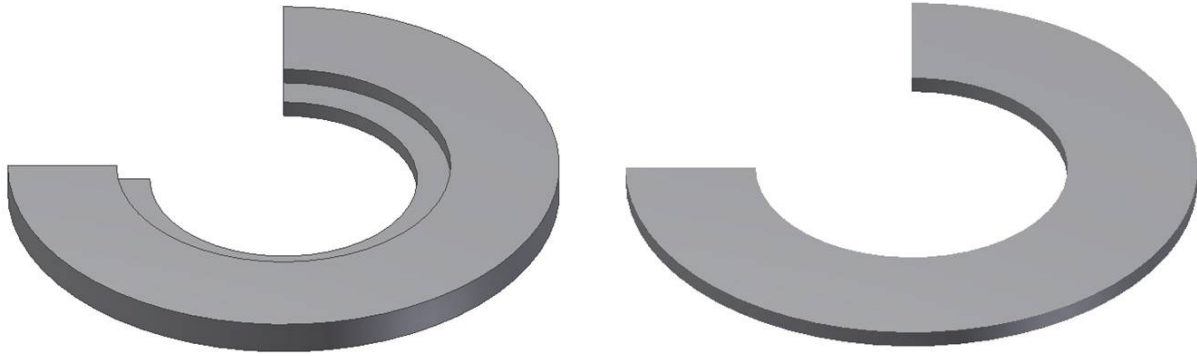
The support plates for the uranium targets were designed in Autodesk Inventor. The right support ring is used by designs which support the target plates using a machined groove. The left support ring is for target structures which sit in the machined lip area.
